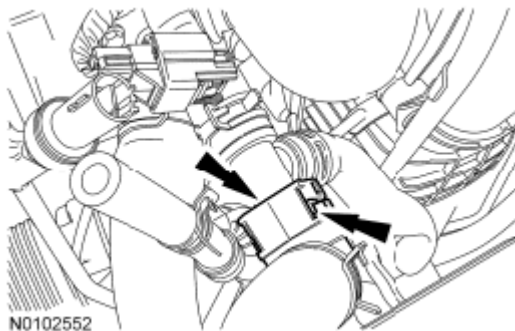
Locating Coolant Degas Bottle Hose And Retaining Clip
